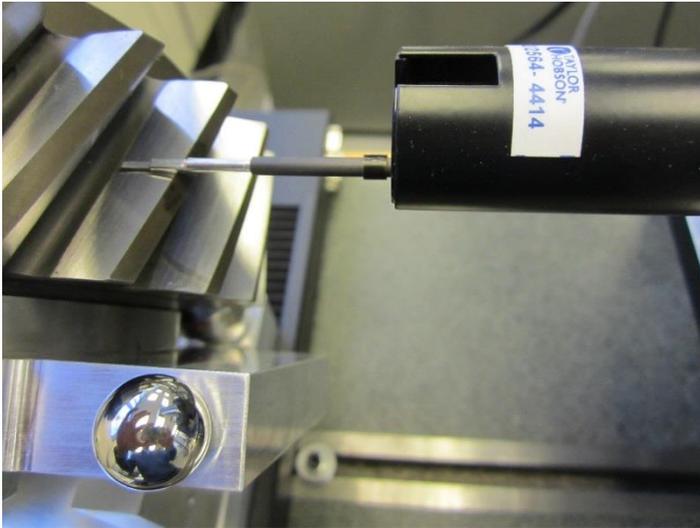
An alignment fixture used to locate a small test gear and ensure the contact stylus is approximately normal to the gear surface.
